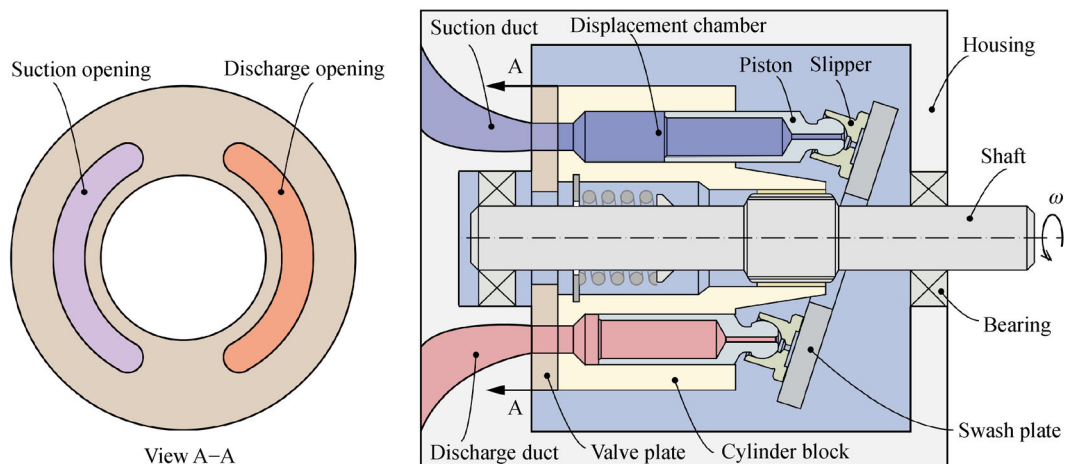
Schematic of a swash-plate-type axial piston pump.
